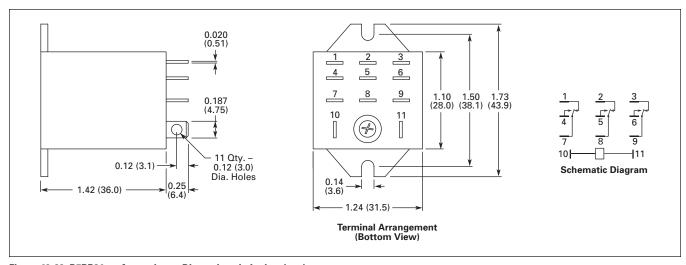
D7PR34 — Approximate Dimensions in Inches (mm)
